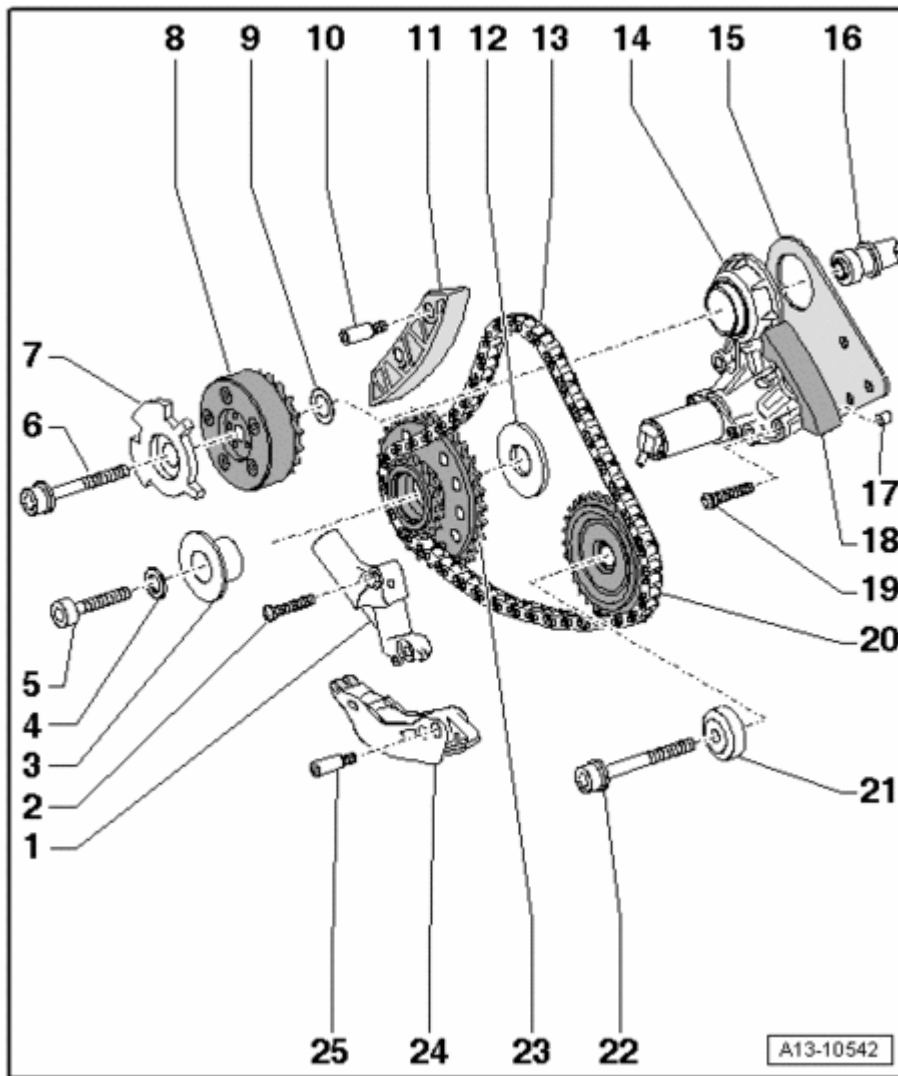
Camshaft Timing Chain, Component Overview (Right Camshaft Timing Chain)
